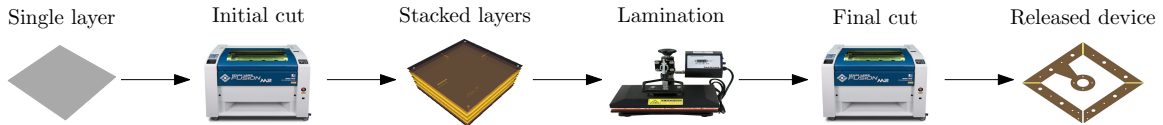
Procedure of making a laminated device using heat press and laser cutter as machinery.
